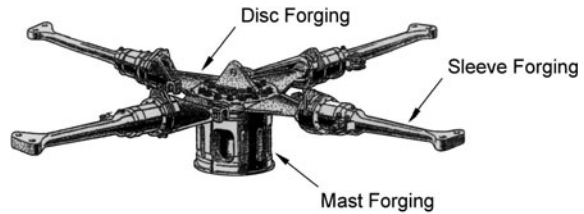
Helicopter rotor using Ti-10-2-3 forgings [1]
